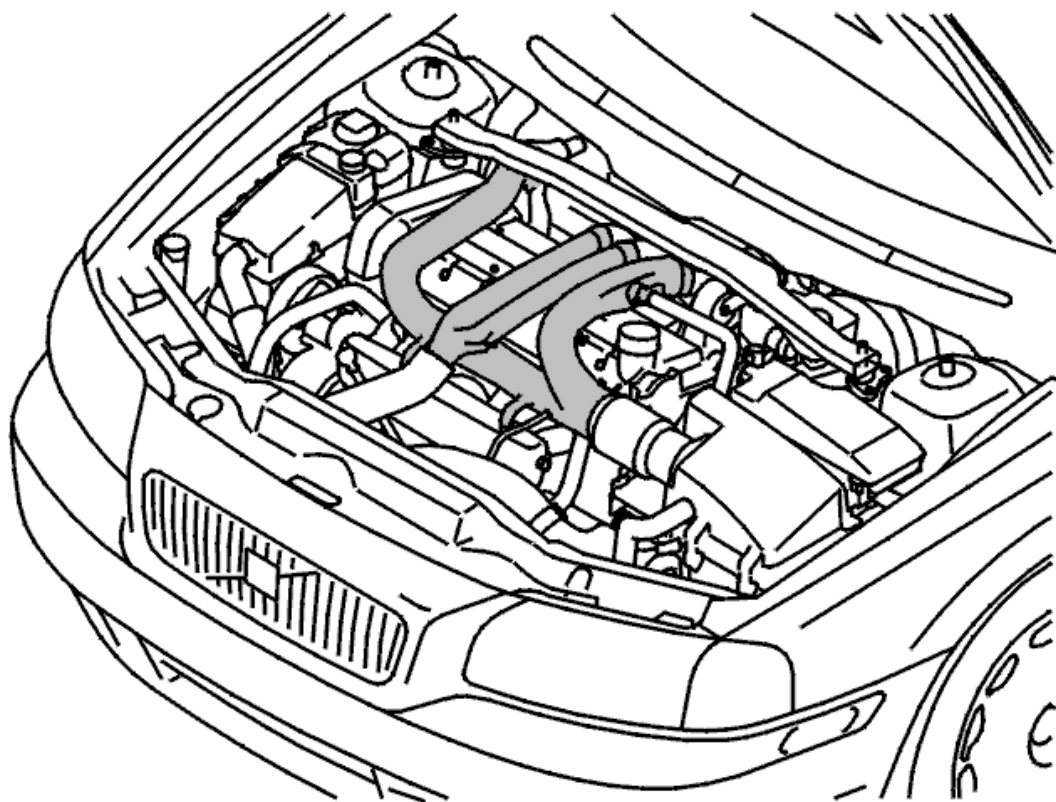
Identifying Plastic Hoses Between Turbocharger, Charge Air Cooler And Air Cleaner/Turbocharger
